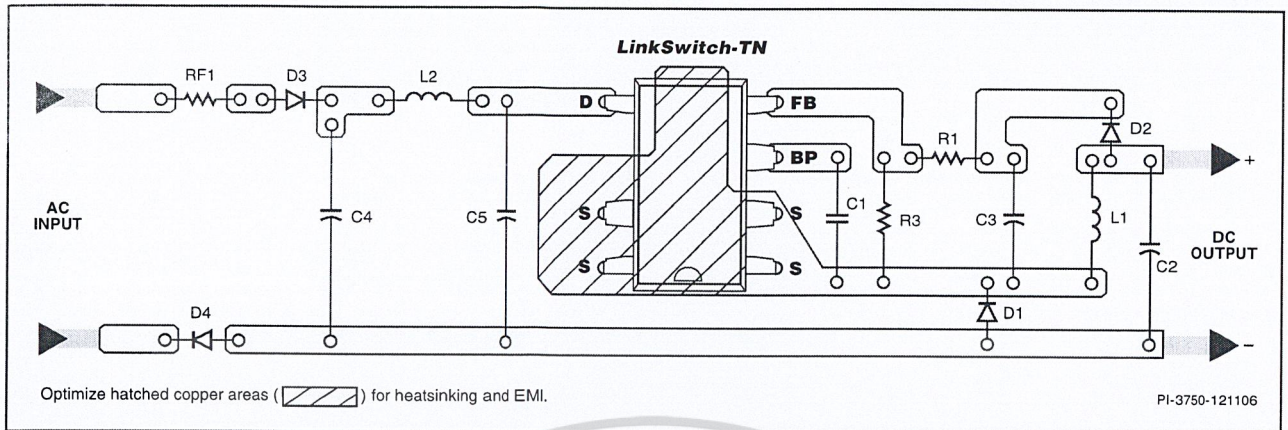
Recommended Printed Circuit Layout for LinkSwitch-TN in a Buck Converter Configuration using P or G Package.
